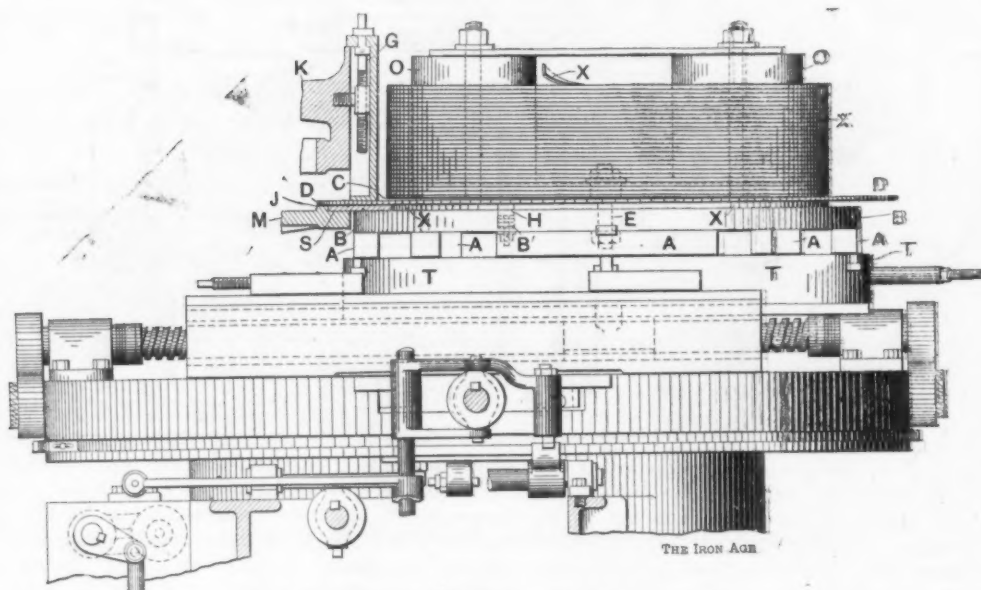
Elevation of Fig. 3 with Gears Removed.
